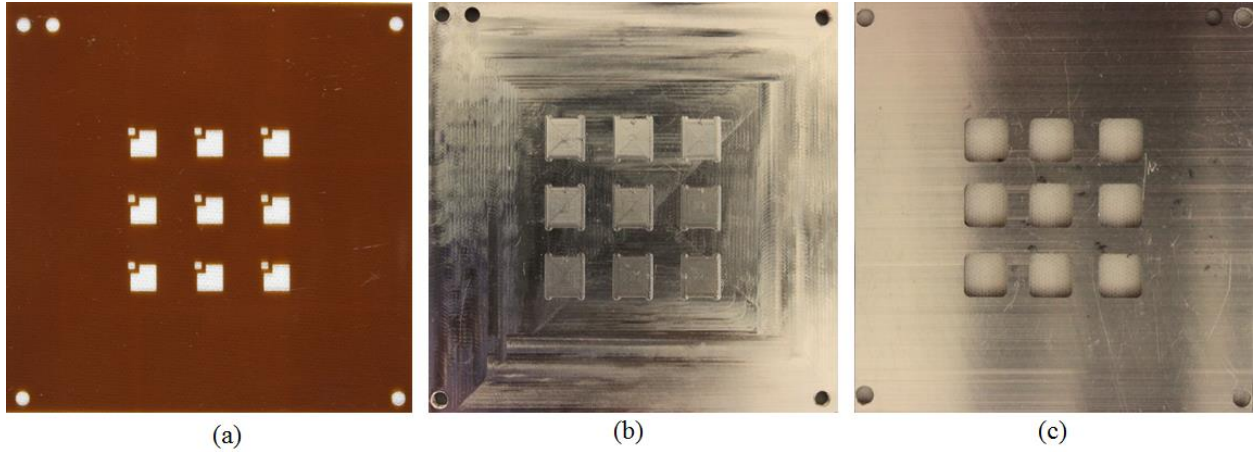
Kapton mask, (b) bottom Aluminum fixture with cavity, (c) top Aluminum fixture with device cutouts for thin film deposition on gate and emitter of Si-IGBT devices
